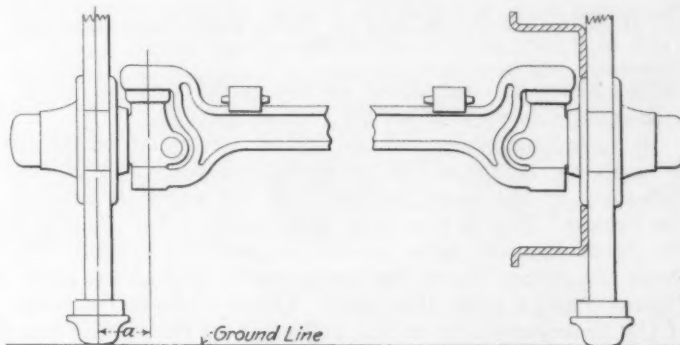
FORMER CONVENTIONAL TYPE OF FRONT AXLE
